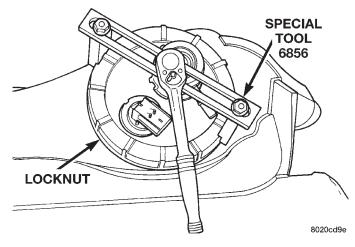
Locknut Removal/Installation—Typical INSTALLATION
